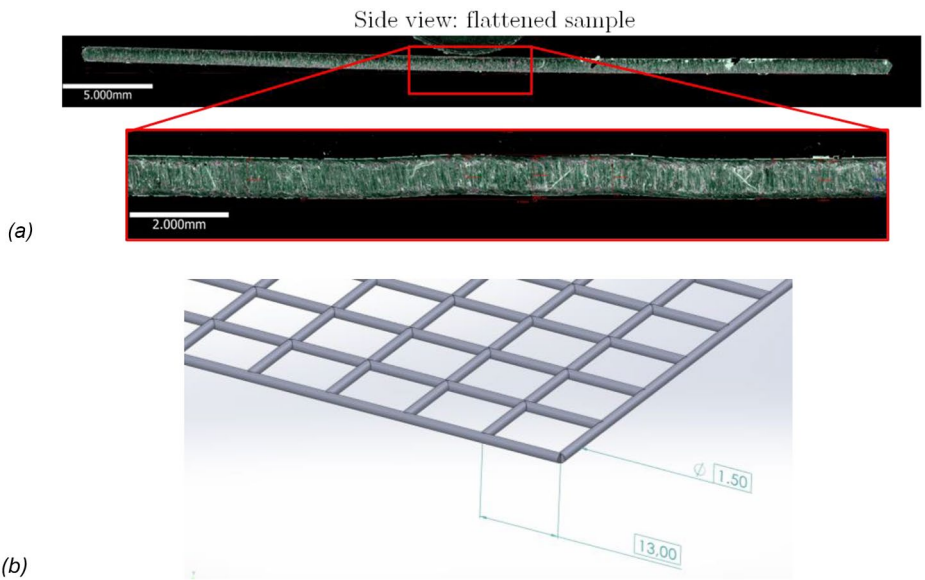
(a) residual m-shaped profile of a specimen after bending and flattening. The sample is observed transversally with an optical microscope; (b) dimension of the steel mesh used in flattening tests with stress superposition
